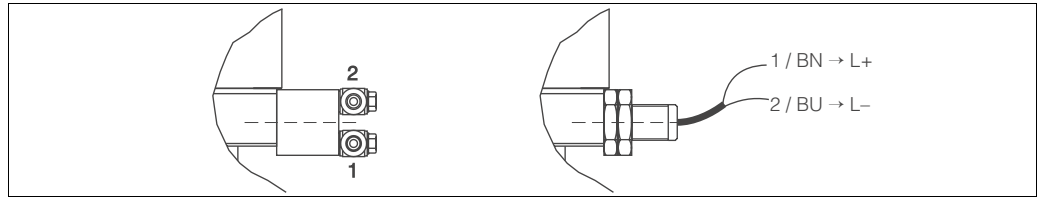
Limit position switches, left: pneumatic (1 = compressed air inlet, 2 = compressed air outlet) right: electric (NAMUR)
